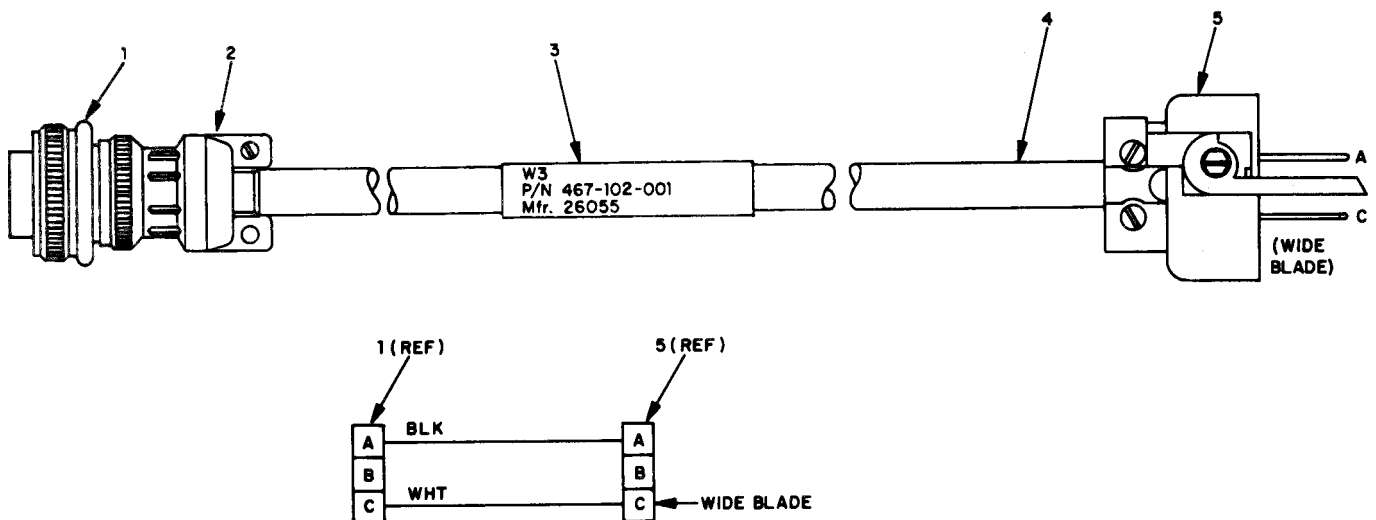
Input power cable assembly W3, part number 467-102-001
